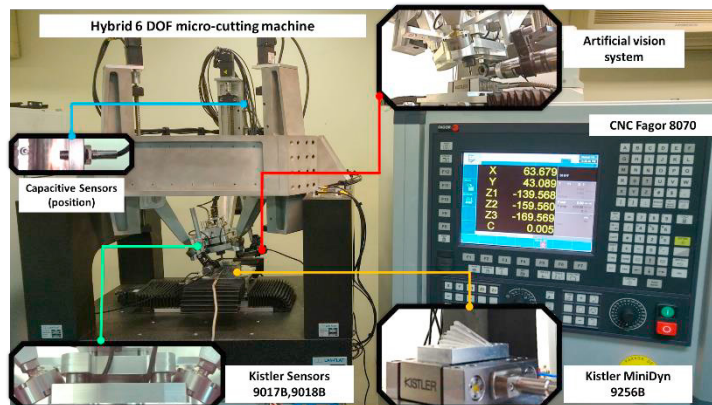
Hybrid 6DOF micro cutting machine tool.
